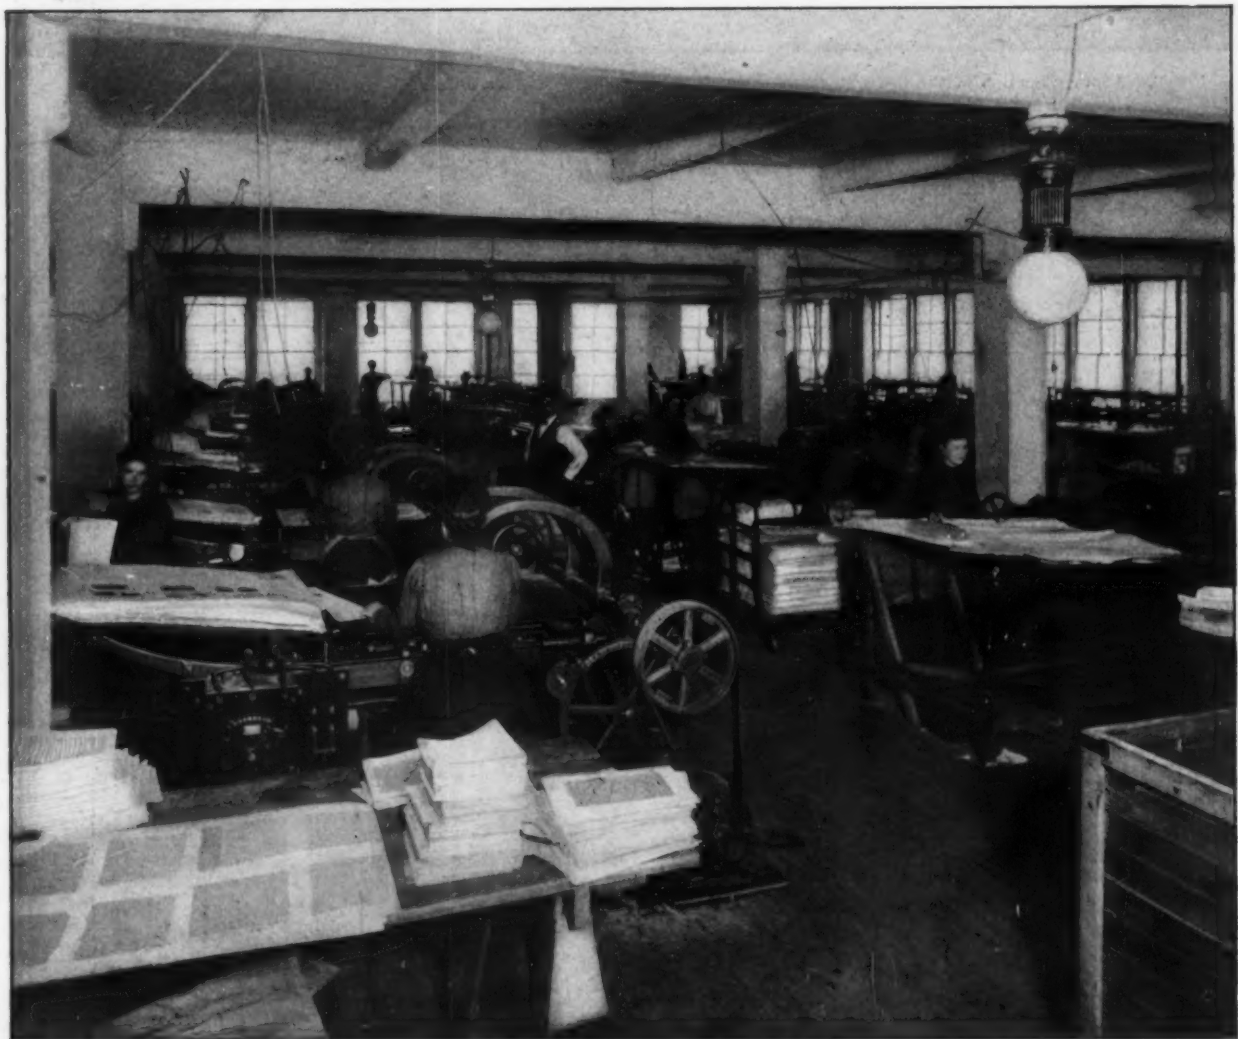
Another View of the Bindery, Showing Hand Feed Folding Machines.
